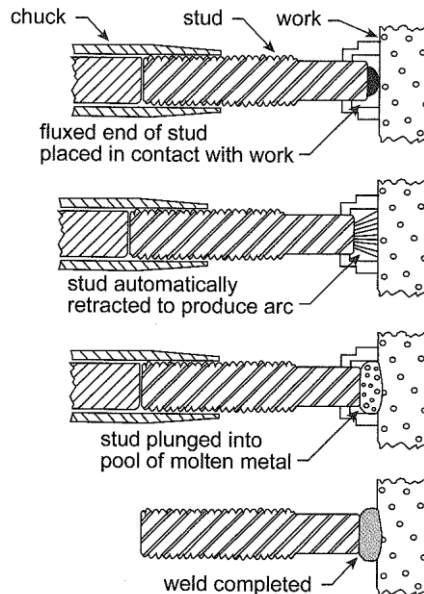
Stud welds permanently join threaded fasteners to parts using heat and pressure
